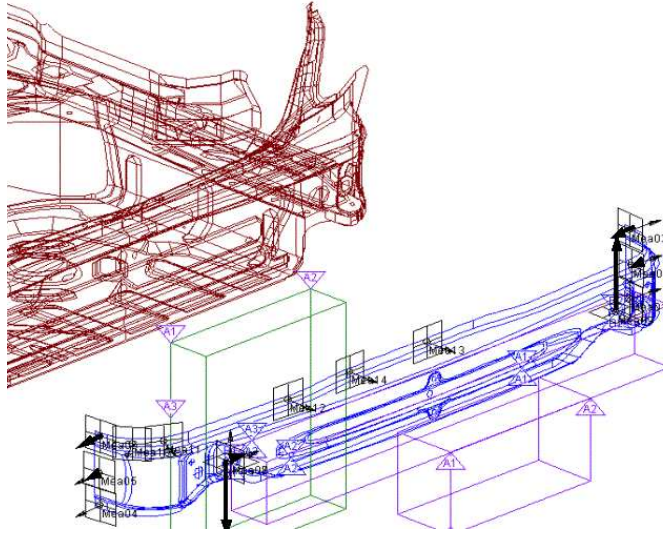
The second designated component, bumper assembly. Contains 37% of the variation.
